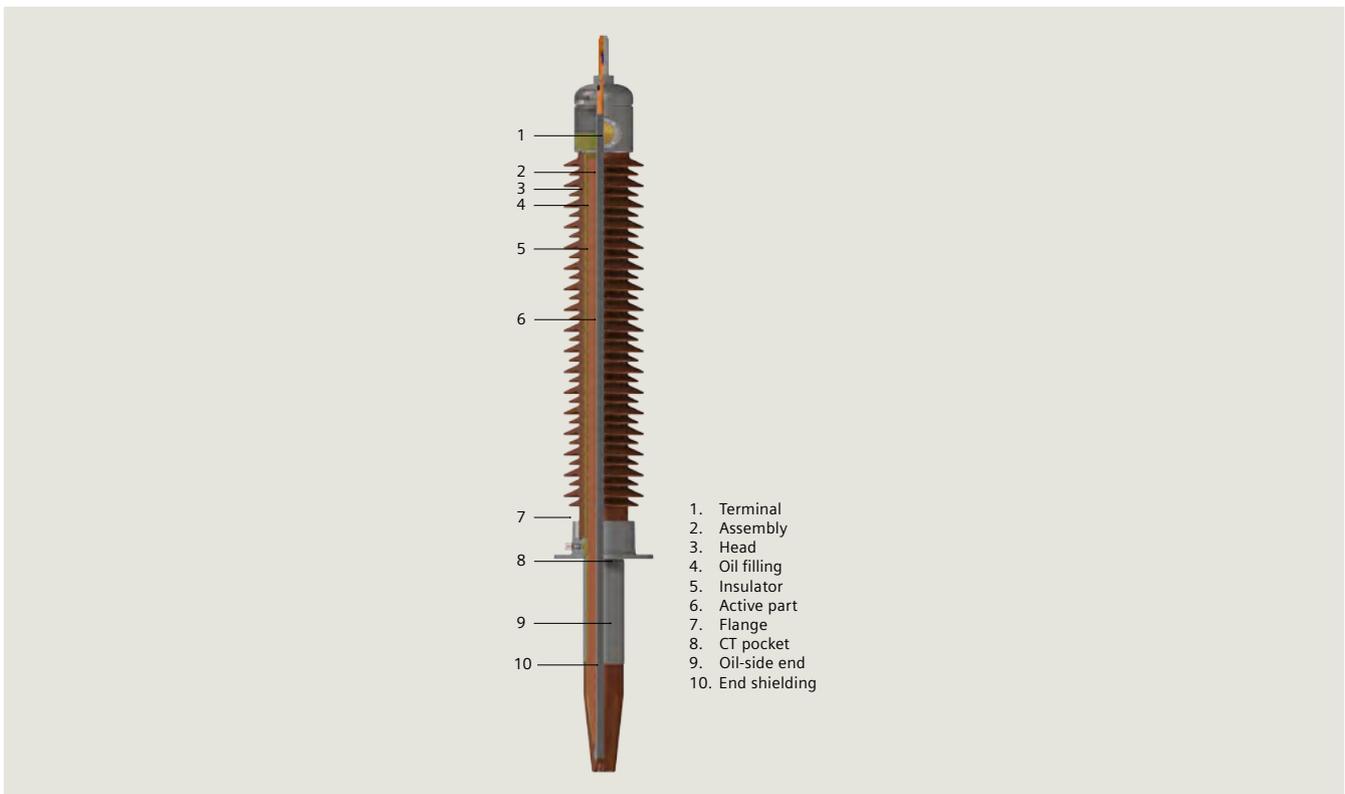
Transformer bushing – oil-impregnated paper (OIP) design – sectional view
